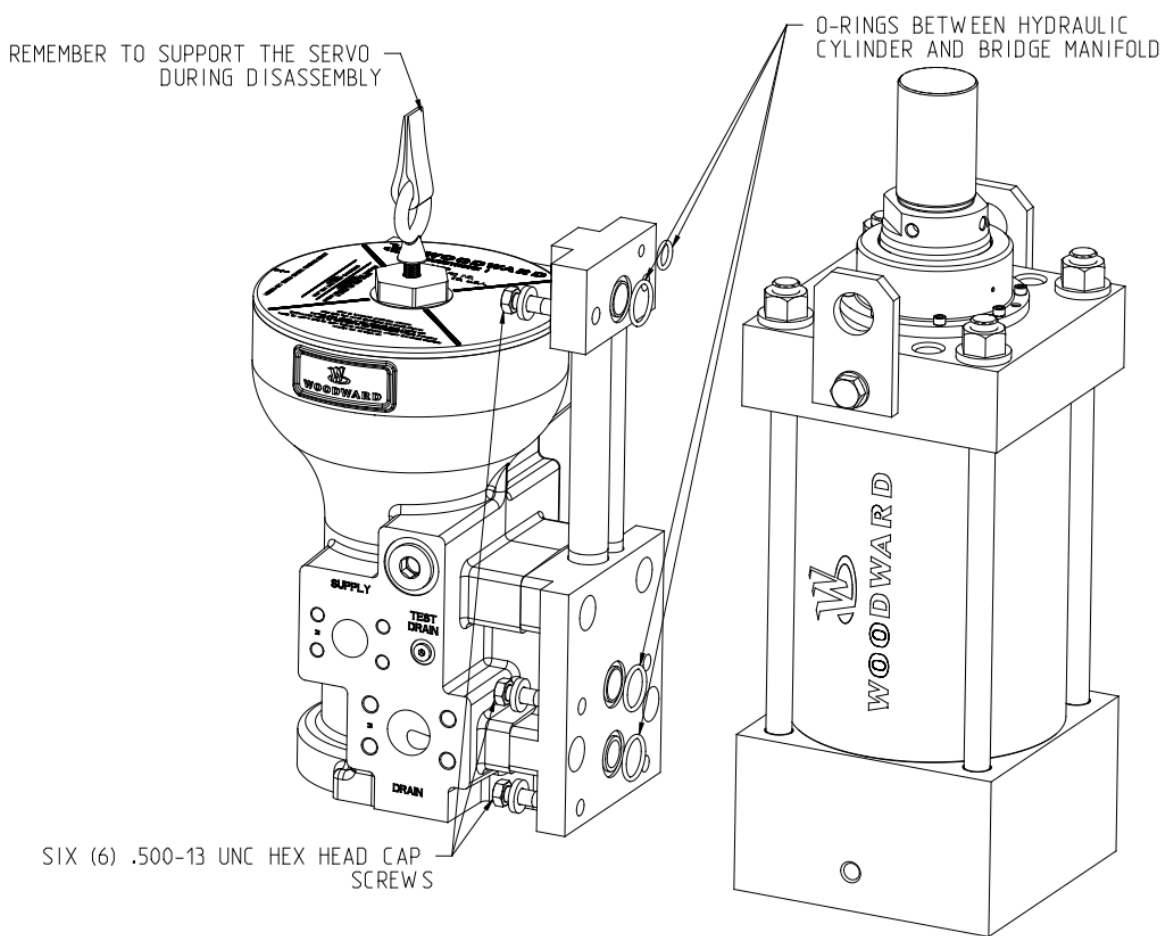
Hex Head Cap Screw and O-Ring Locations
